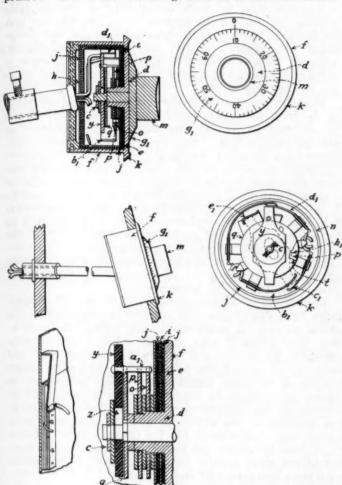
ACTUATING DIAL OF THE LOCK SHOWN IN Fig. 6 In Addition to the Actuating Dial of This Lock, Assembly and Cross-Sectional Views Are Shown
